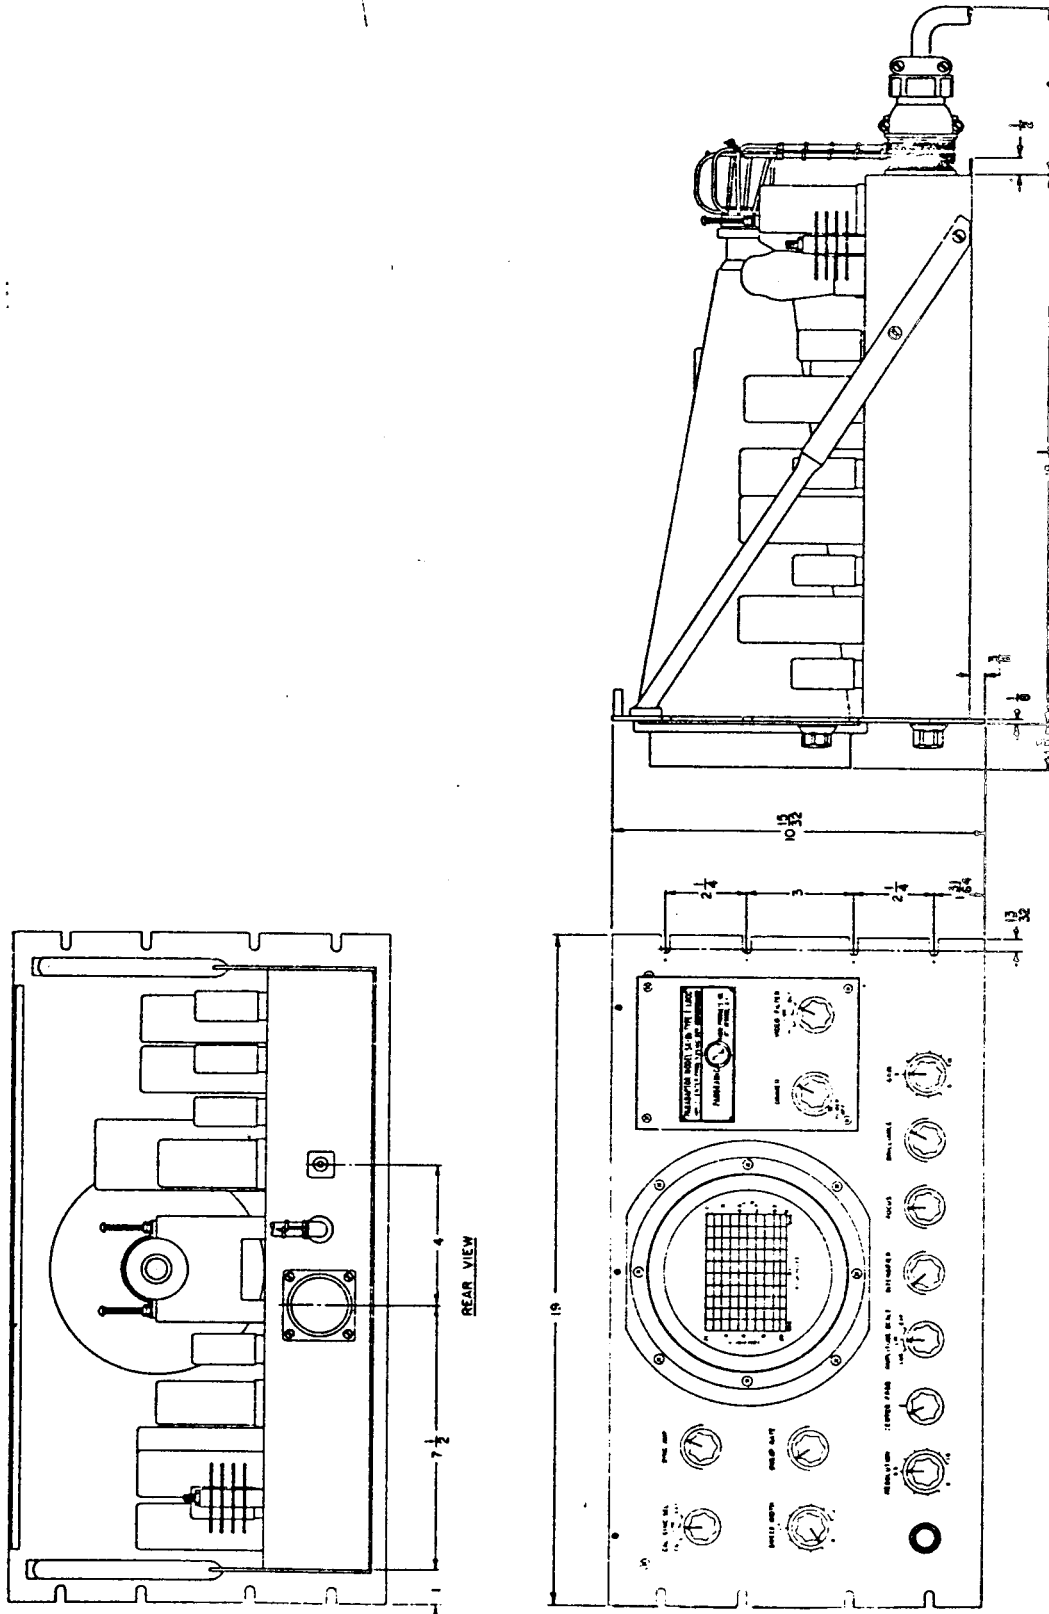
Outline Dimensional Drawing, Model SA-8bZ, Rack Mount Style.
